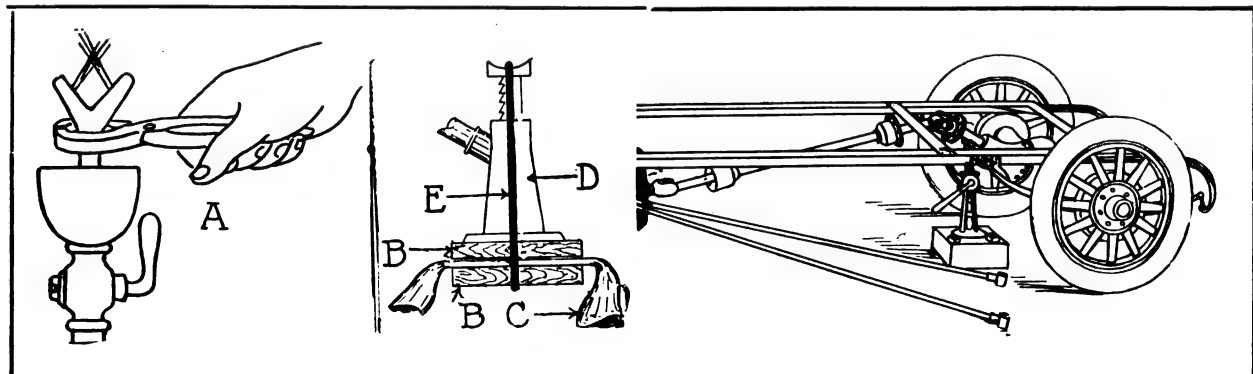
Clearing the Acetylene Burner of Obstructions—Emergency Tire Press—Repairing Broken Drive Shaft Pin.
